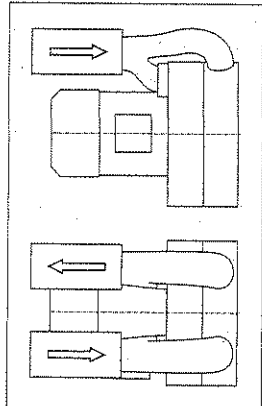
2BH1943 (two-impeller pump-motor unit with double-flow design)
